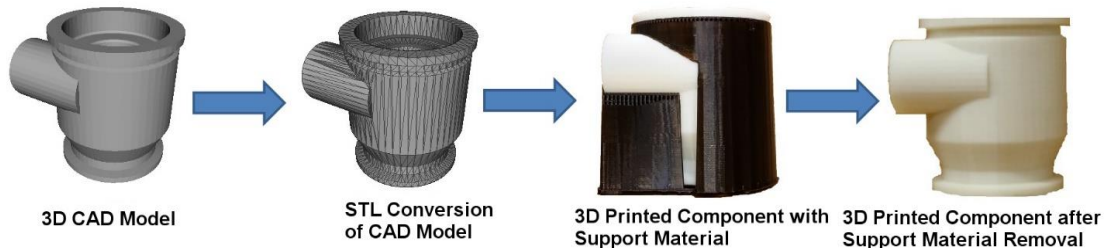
3-D printing process: From CAD model (left) to printed component (right)
